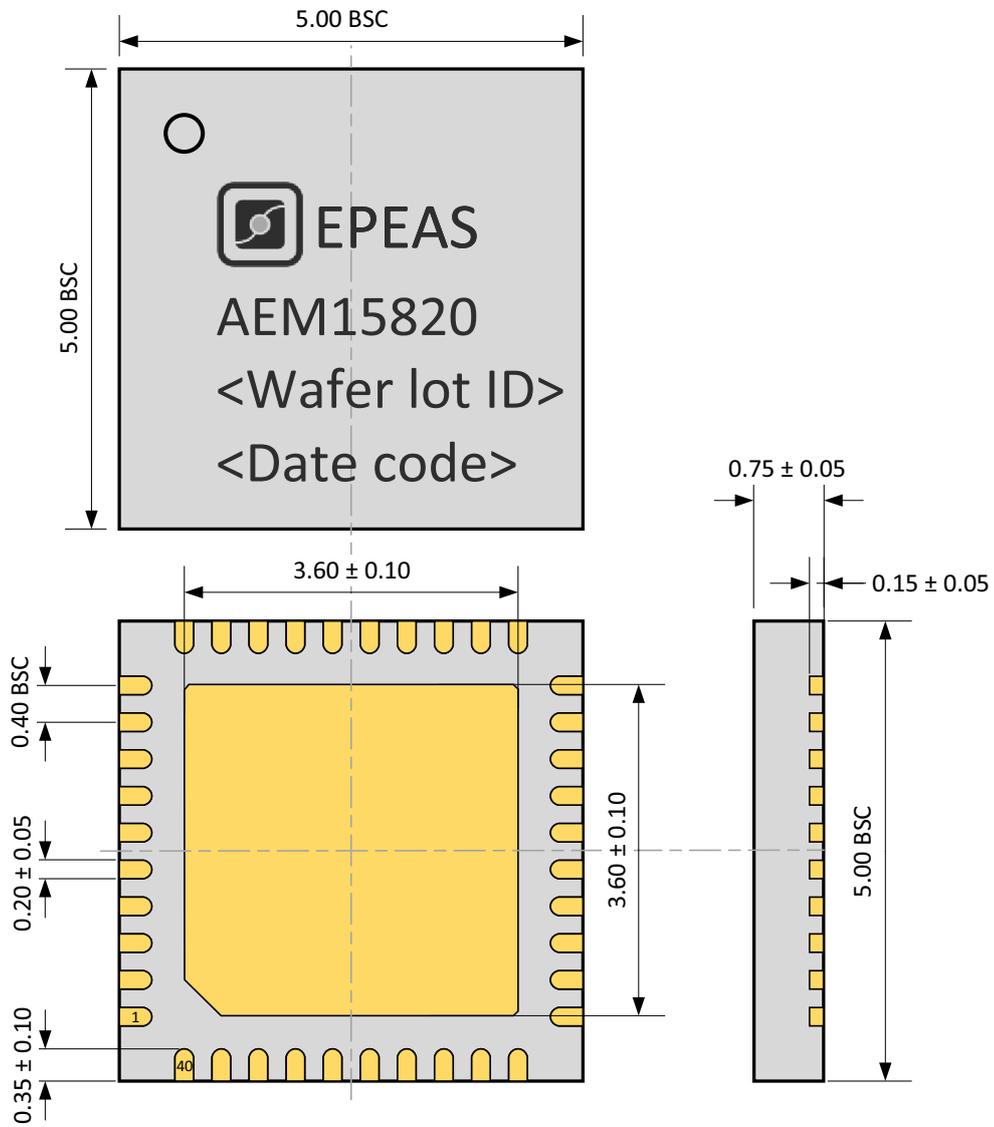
QFN 40-pin 5x5mm drawing (all dimensions in mm)
